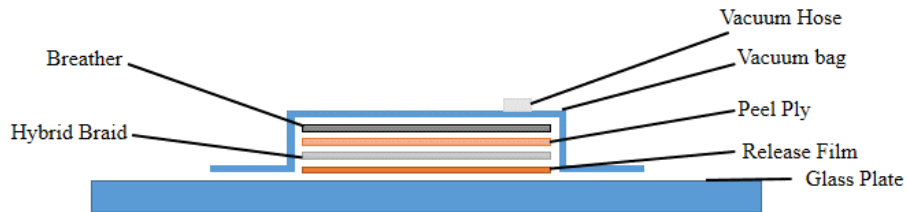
Vacuum Bagging Manufacturing for the hybrid braid sample
